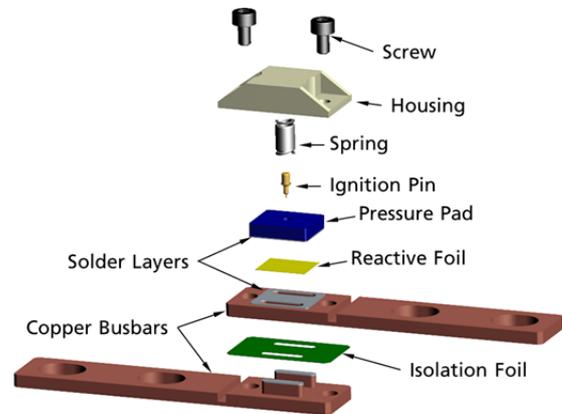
Exploded view of the assembly of a high-current low-voltage power antifuse bypass device prototype.
